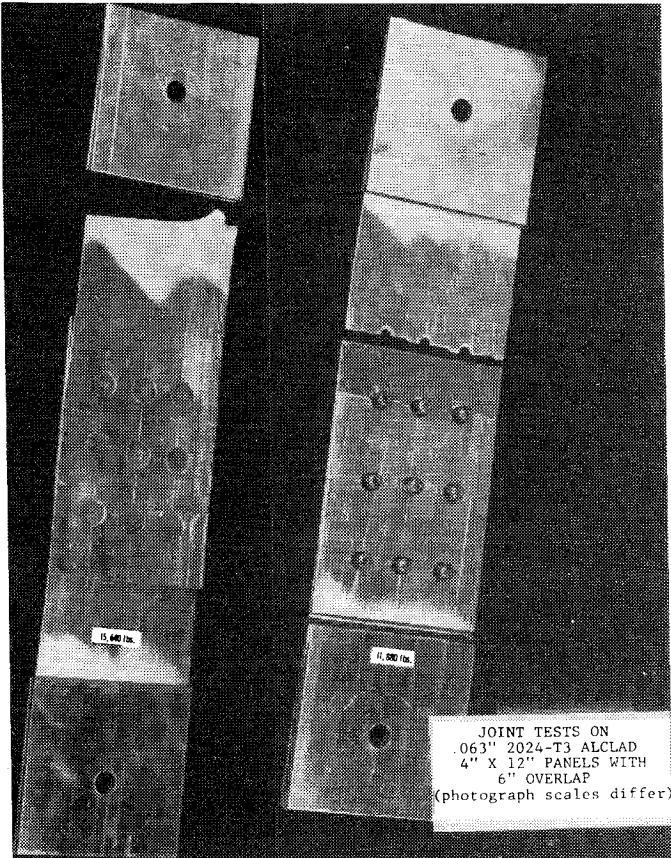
A test of nine-element joints shows that ultrasonic welds carry 15,640 lb without failure, while the Hi-Lok joint failed through the minimum section at 11,880 lb.
